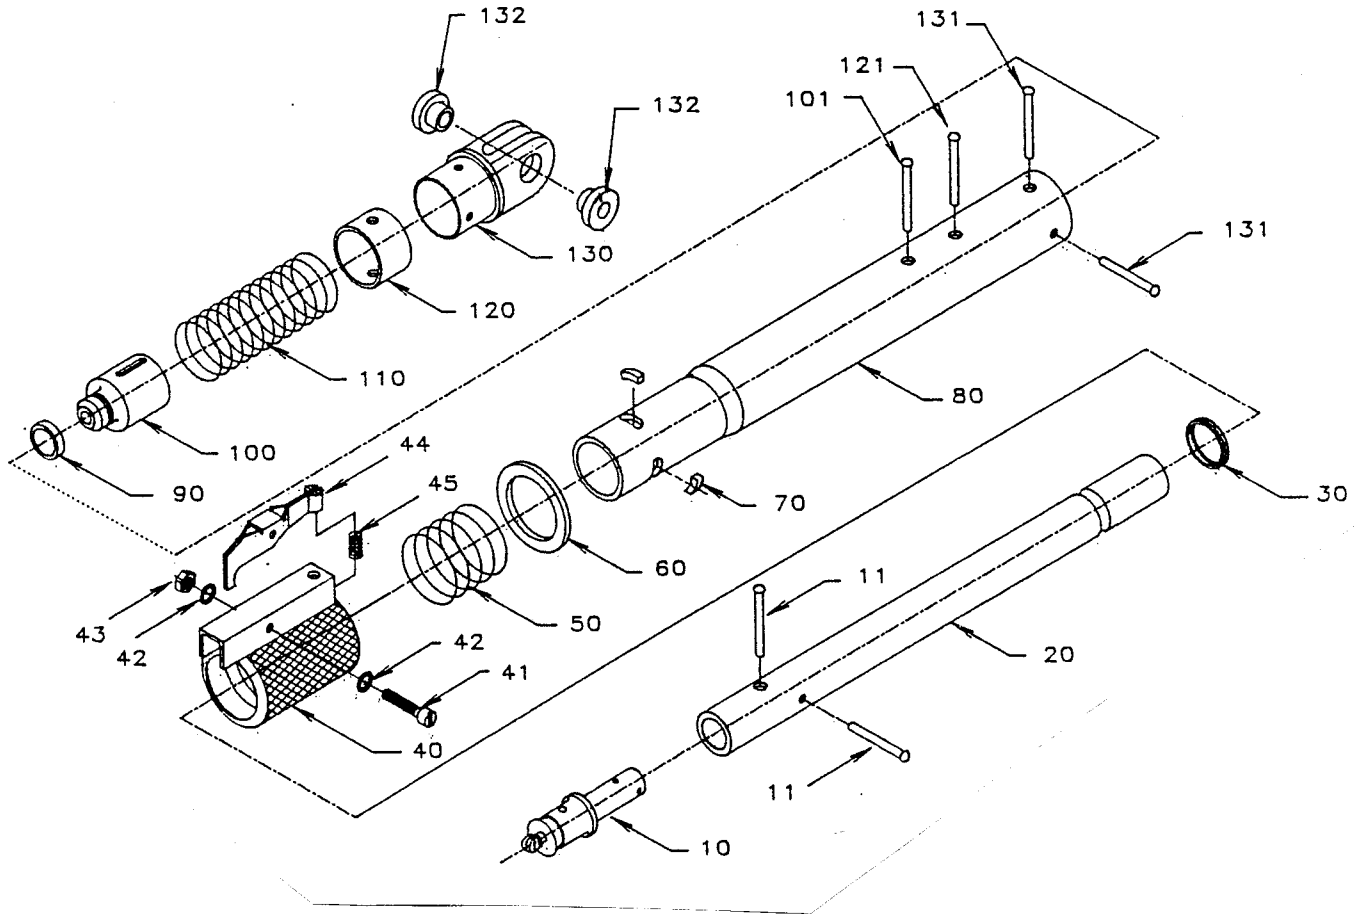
A2898-1 STRUT ASSEMBLY
